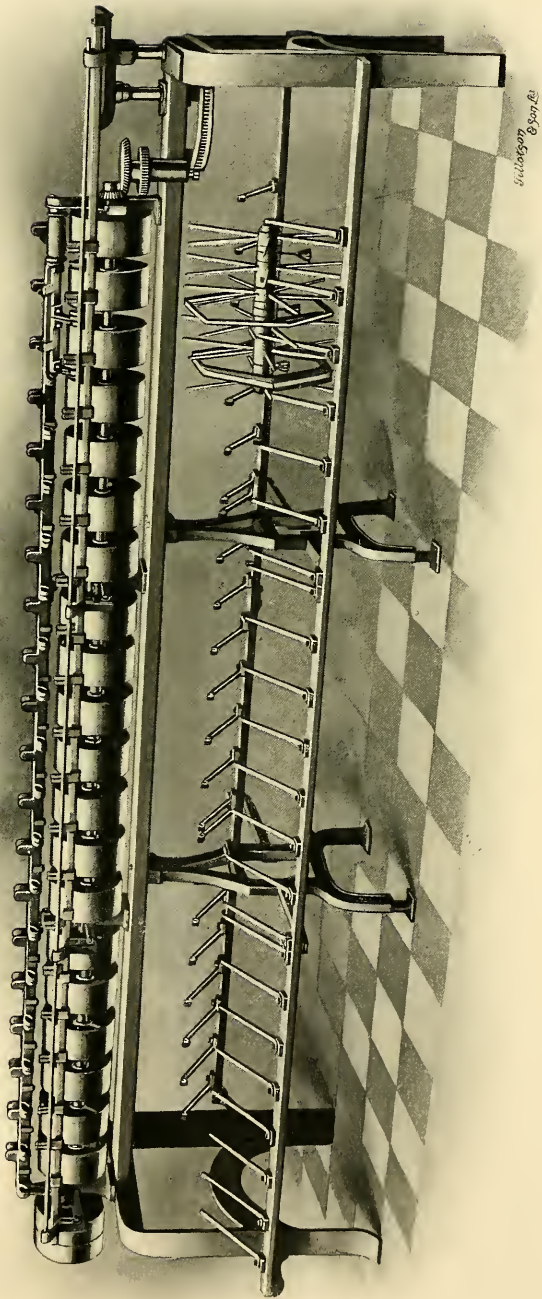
Improved single drum winding frame (latch and catch). (Made by Messrs Arundel & Co., Stockport, England.)
